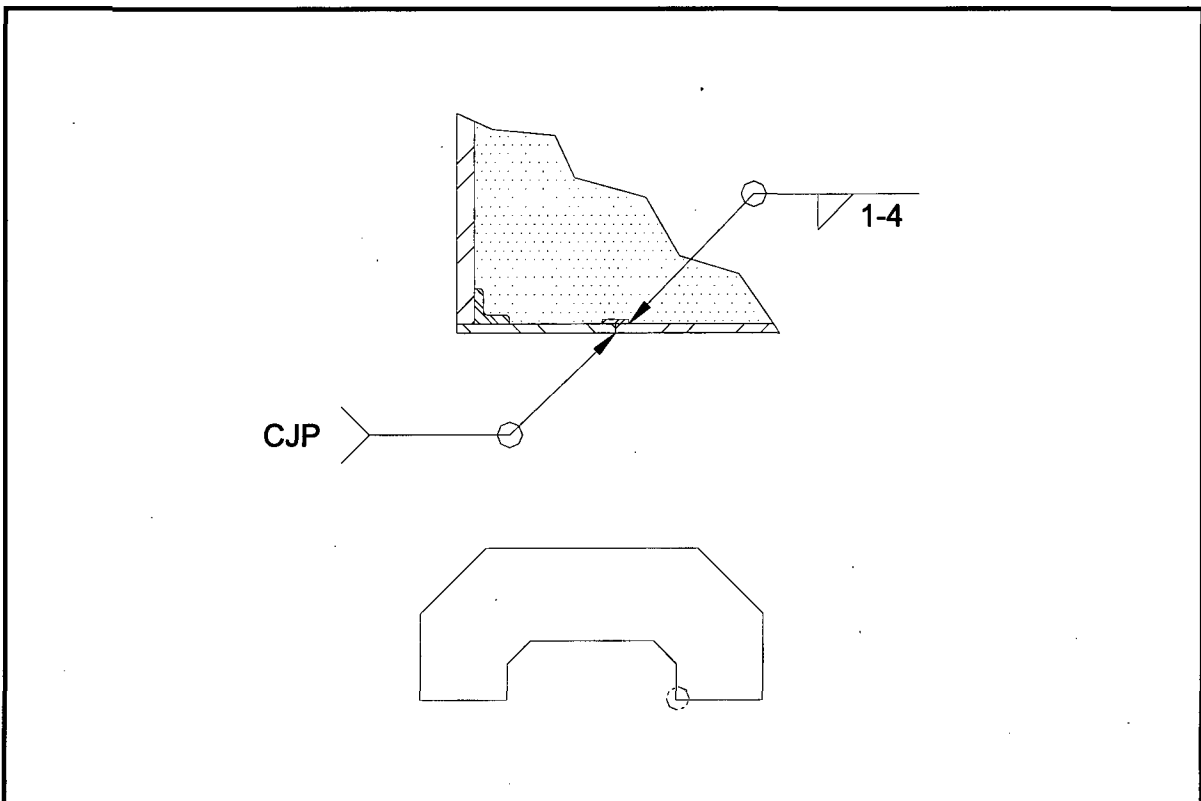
Added Weld Seam Near Impact Limiter Inner Diameter
